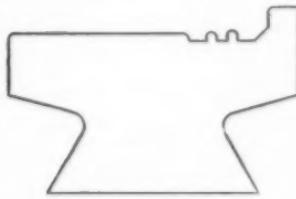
One of many form tools which are difficult to measure mechanically. To inspect this tool with an inspection Comparator and measuring machine, only a simple chart with right angle lines and a series of radii is necessary, in addition to the Comparator. This principle is used in measuring form tools, profile gages and for general contour inspection. When it is desired to measure several tools, gages or production parts of duplicate shape, the contours may be compared against an enlarged master outline, as mentioned in the case of buttress threads on airplane cylinders.
